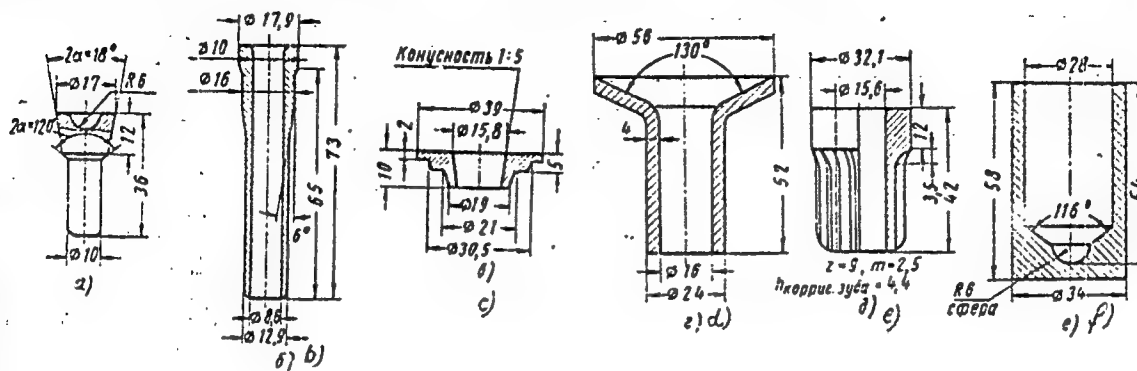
a - adapter; b - nipple; c - spring disc; d - regulator disc; e - pinion; f - pusher.
